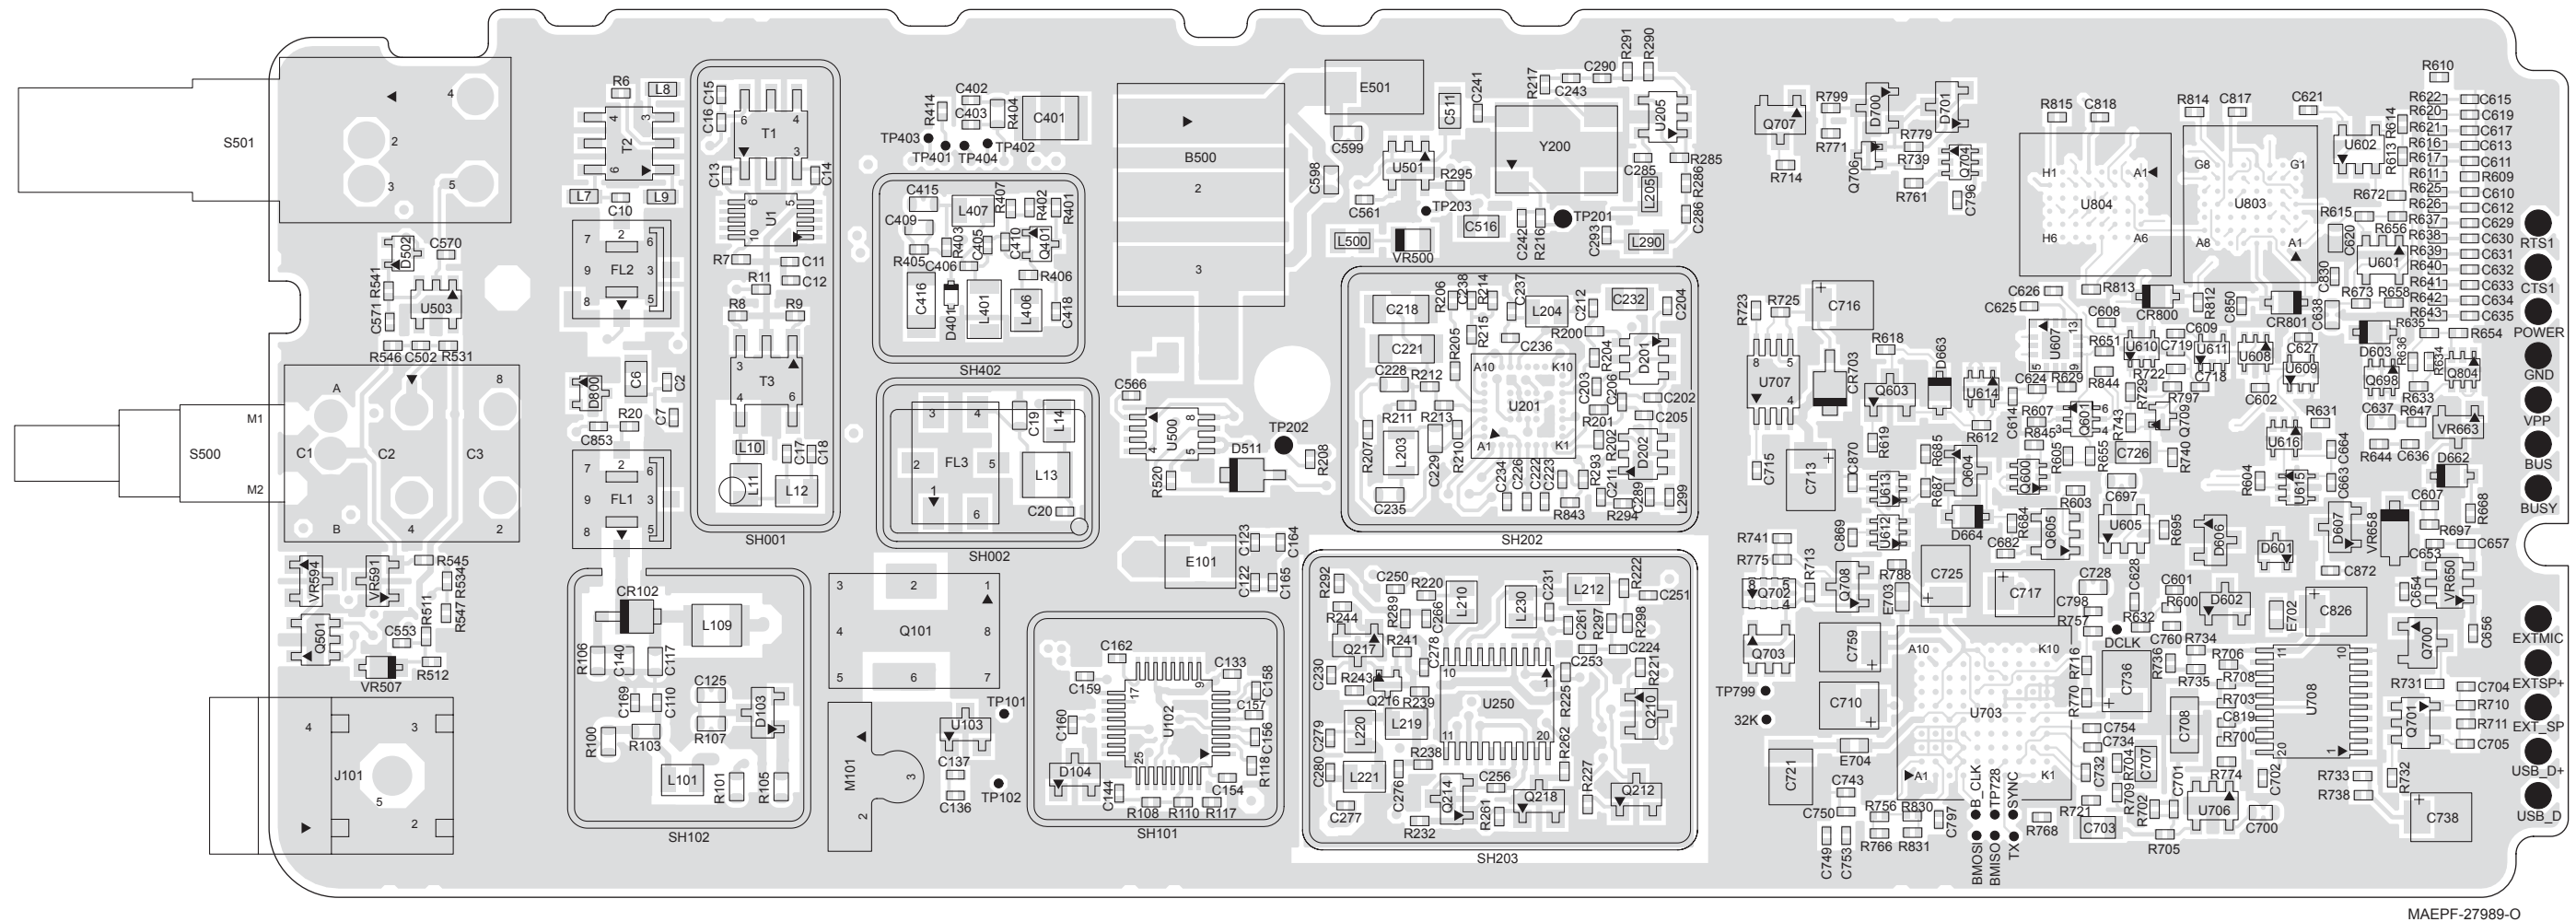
PMUF6541G Main Circuit Board Component Location Detail, Viewed from Side 2
